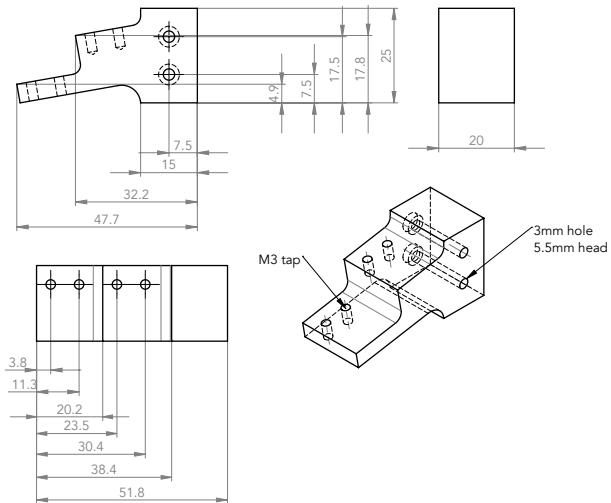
Technical drawing and measures of the 1st set of connectors of the LFO flexures.
